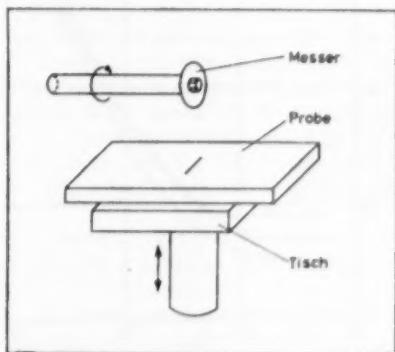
Cutting apparatus. Glossary—Messer: knife; Probe: test-piece; Tisch: table.
